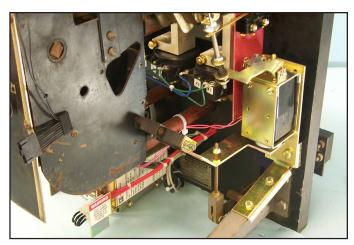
Overview: Trip Finger and DTA Assembly Installed in the Breaker.
